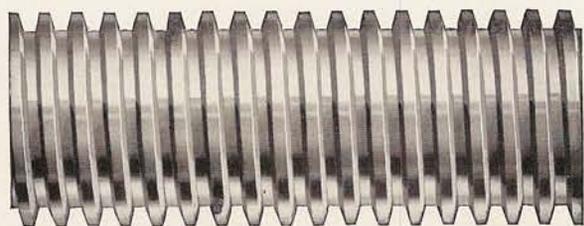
Section of Lead Screw—Actual Diameter Used on the 16-inch Lathe. It is Guaranteed to Meet the Most Exact Requirements in Cutting Accurate Threads
